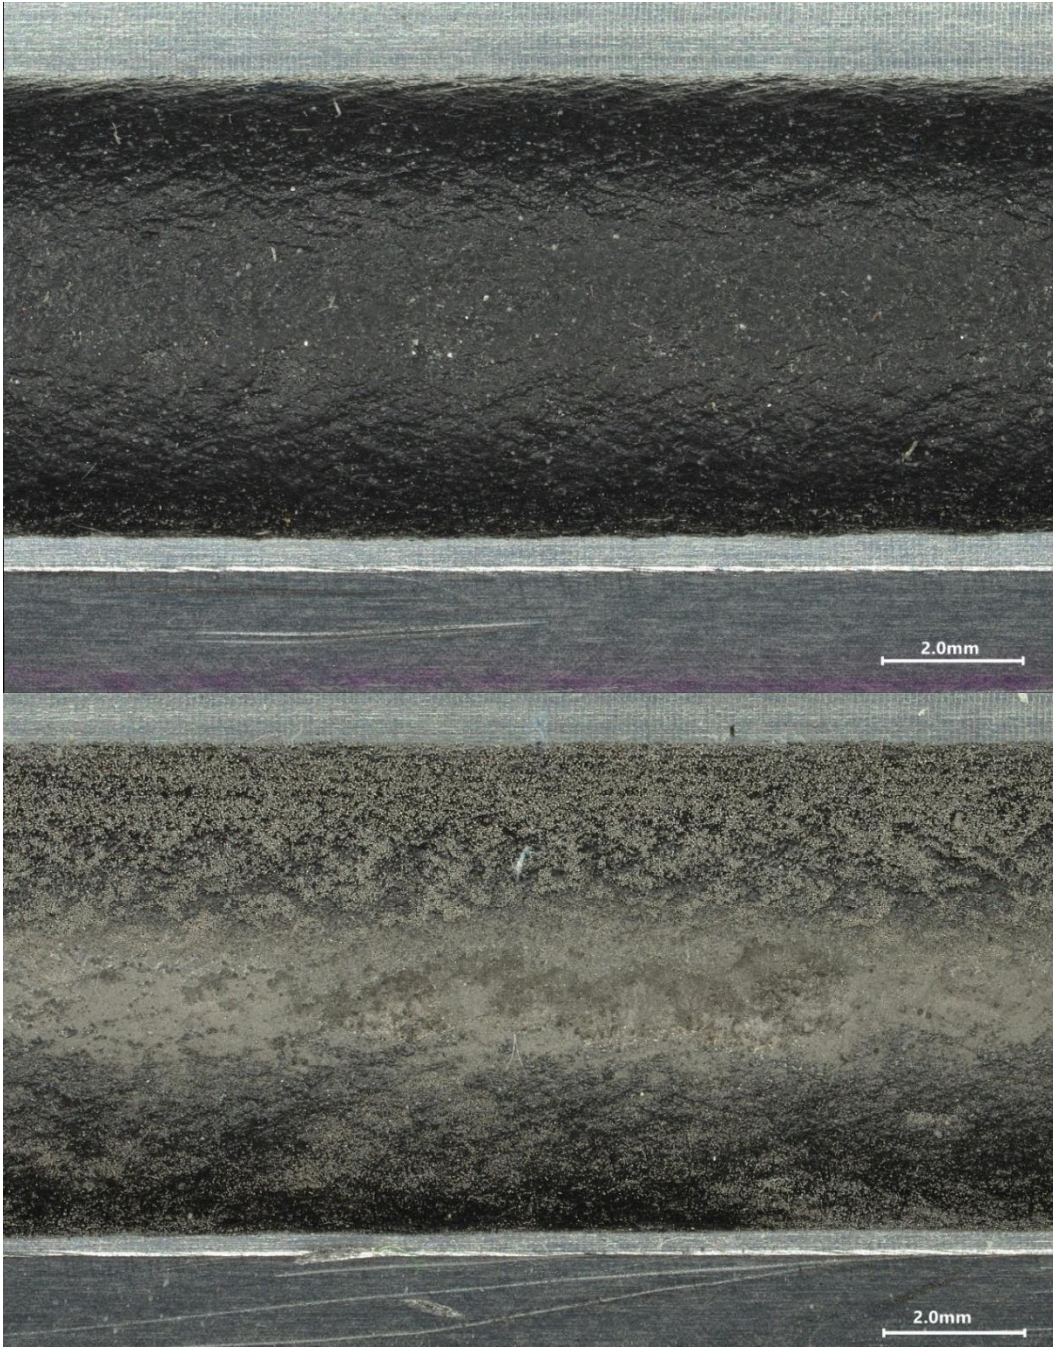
Recoater arm no. 4 before (top) and after (bottom) the print
